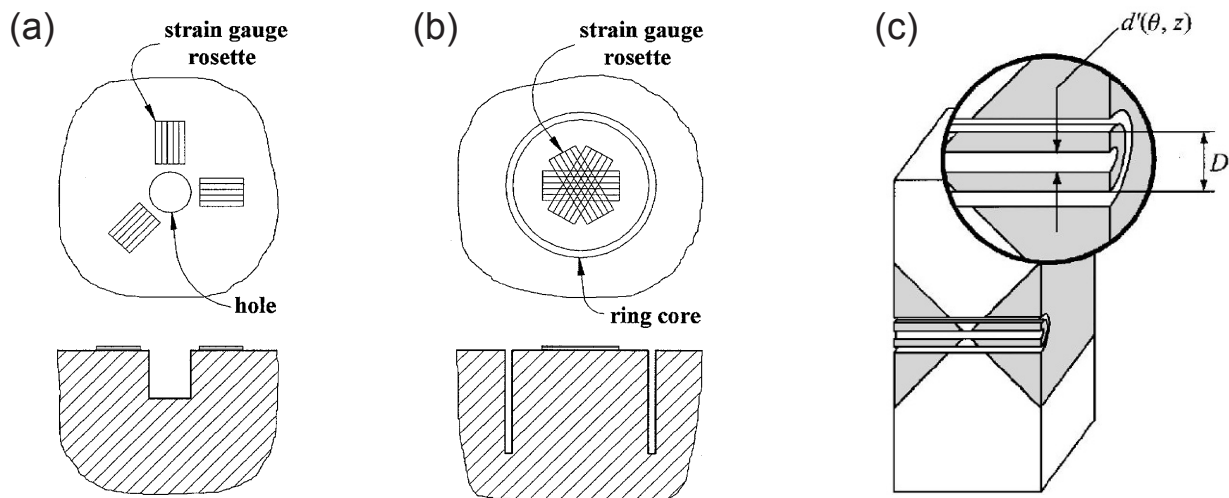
Hole-drilling methods: (a) conventional hole-drilling method, (b) ring-core method, (c) deep hole method (from [29]).
